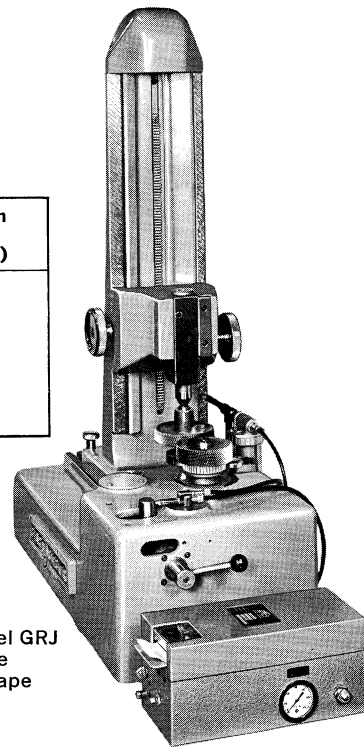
The Model GRJ rolling fixture adapted to check internal gears.
